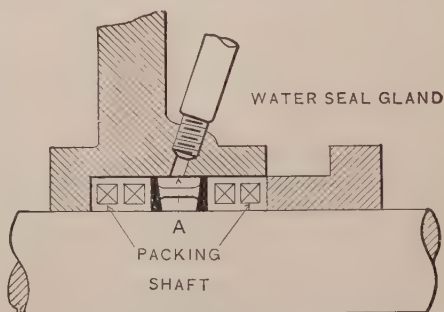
Shaft stuffing box of Centrifugal Pumps, showing water seal.
